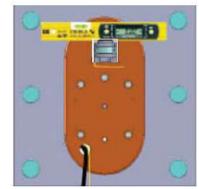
Fix base unit plate on optional plate with 6 M10x22 Hex head bolts.
